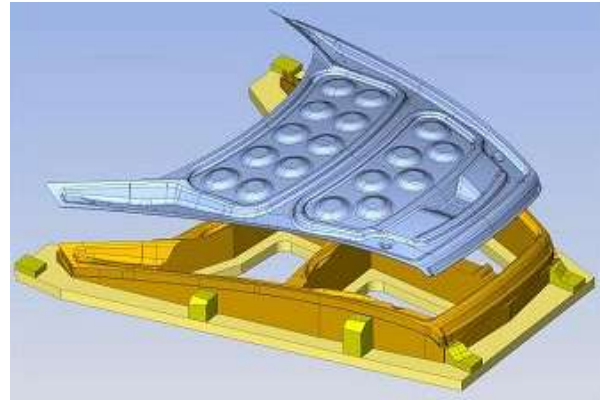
CAD model showing HPPC inner frame and clamp-frame for edge trimming by a CNC router (image courtesy of RangerPlast).
